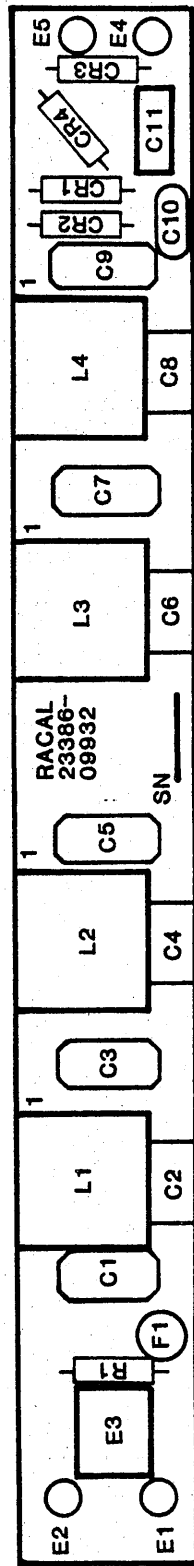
RF Low Pass Filter Circuit Card Assembly (A1A1)
